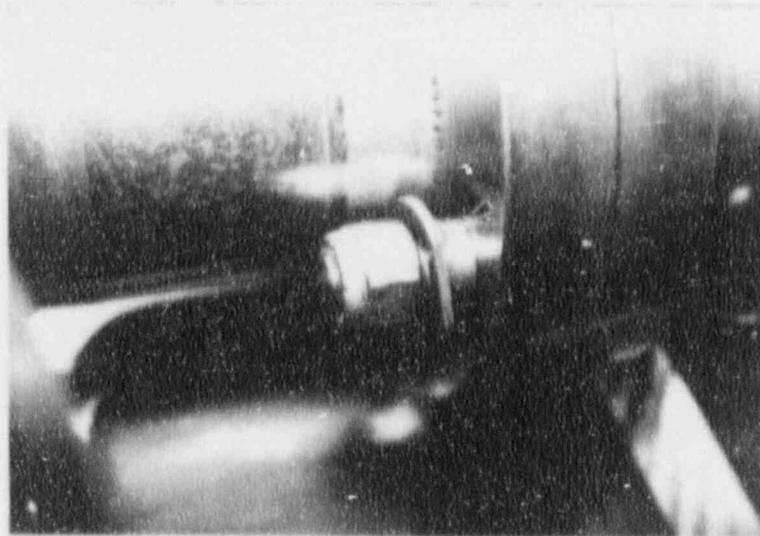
View of the as-found condition of the flange connection illustrating the approximately 1/4 inch displacement of the broken bolt.
